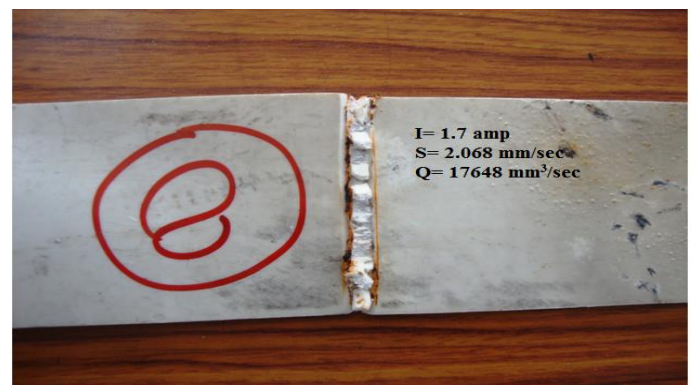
Weld bead formed in 8<sup>th</sup> experiment
